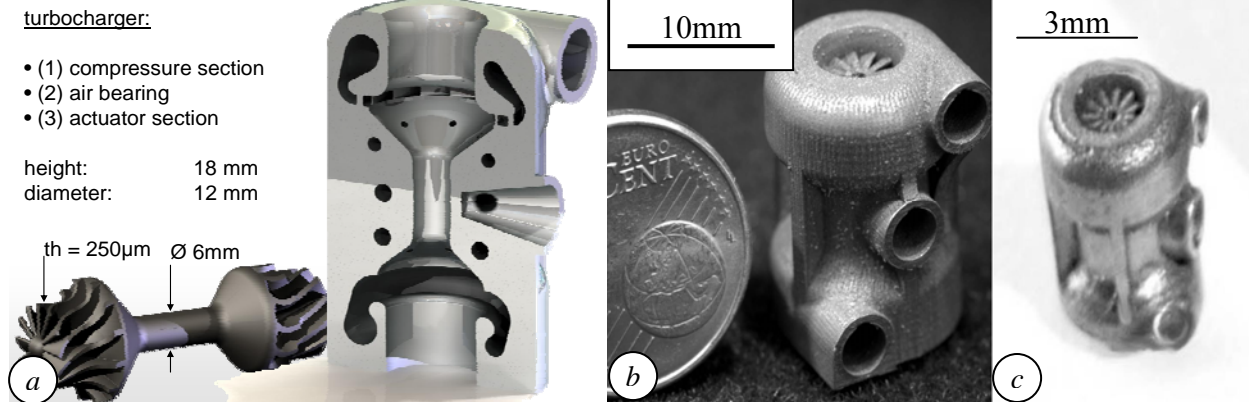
(a) design drawing of the turbo charger's cross section view; the double rotor of the sintered machines is not detachable. (b) laser micro sintered turbo chargers: with the conventional technique the lower limit were the admeasurements of the construction (c) with compressed powder a 3.5-fold miniaturization could be achieved.
